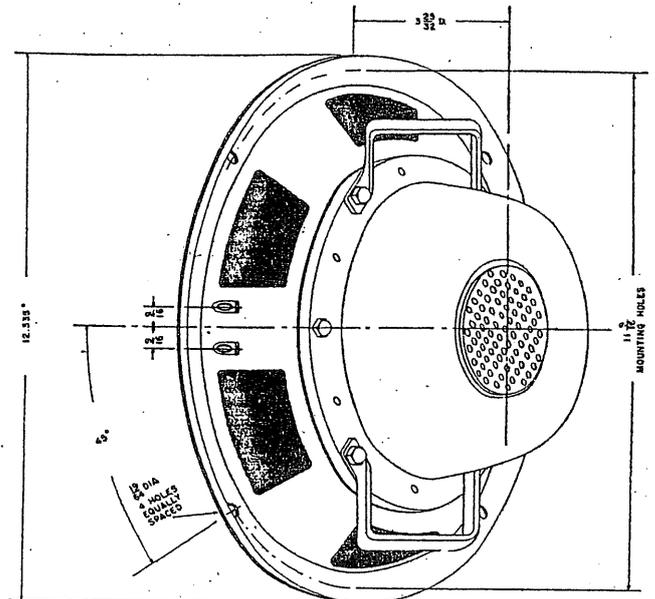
728B Loudspeaker, Dimensional Drawing.
